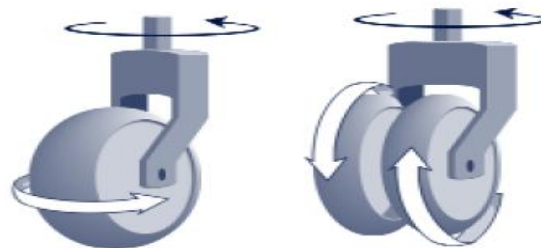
single wheel caster pivot on the wheel surface, leading to increase force due to friction and increase damage. Twin wheeled caster (right) reduce friction and wheel damage by rolling when the caster is rotated
